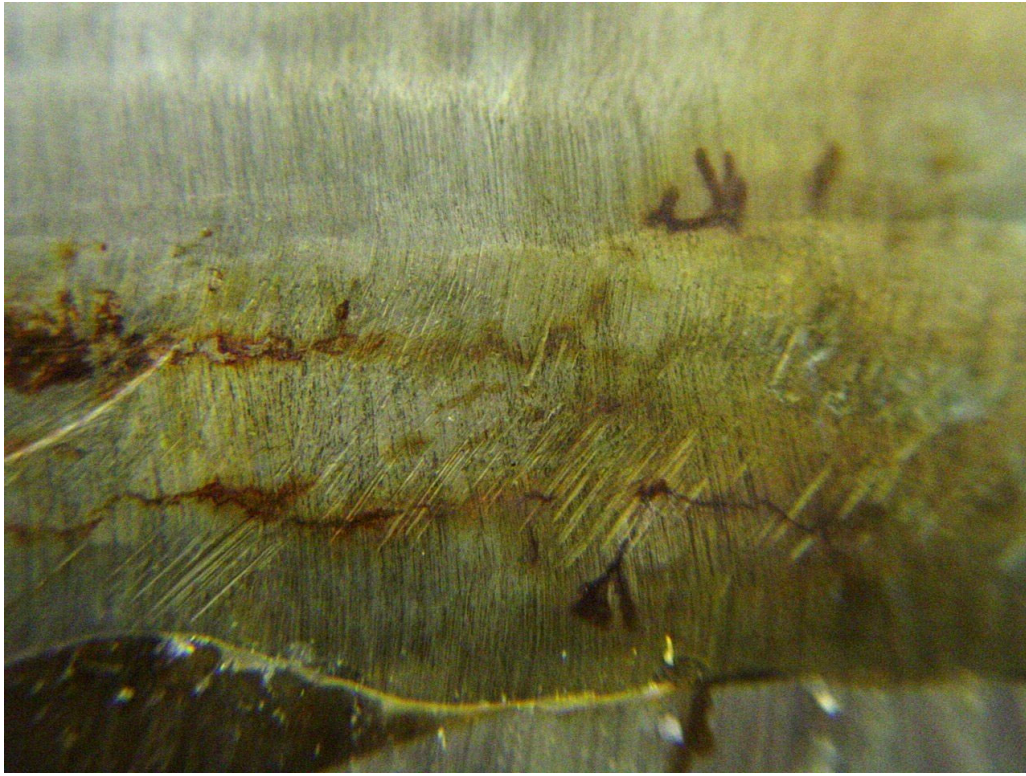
Close-up view of weld and heat-affected zone after 120 days exposure to chloride salts. Cracks are visible in the dark areas.
